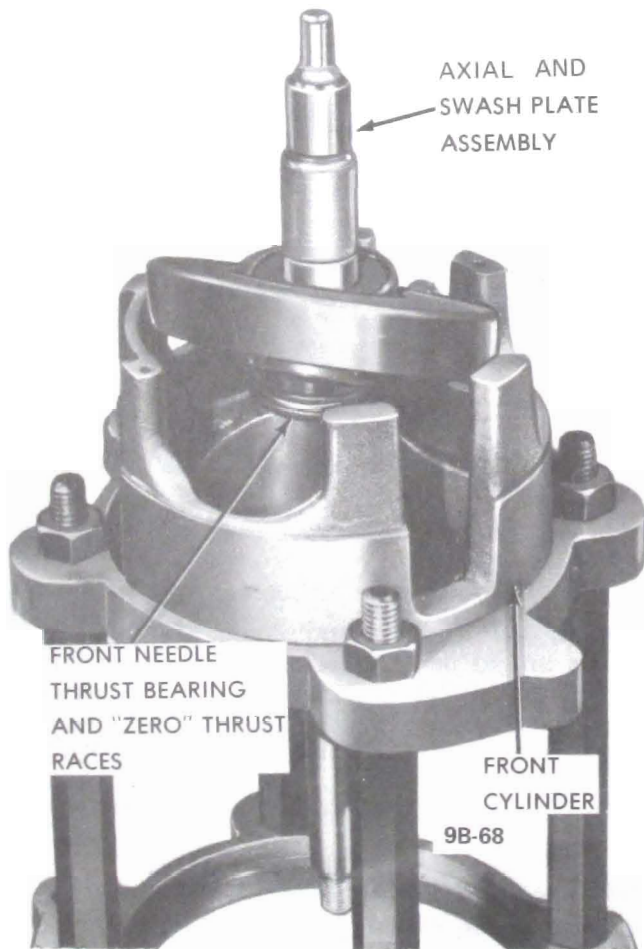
B-77 Shaft and Front Needle Thrust Bearing in Cylinder Half
